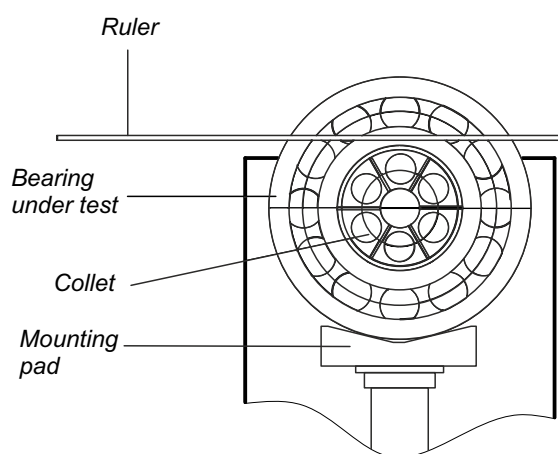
Installation diagram for the test device of roller flangeless bearings (side view)
